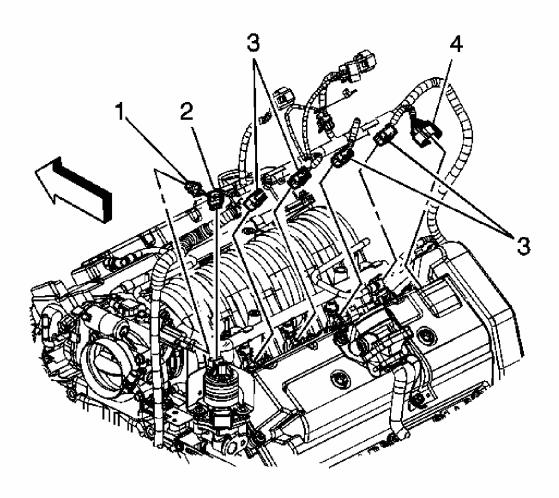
Locating Engine Harness Electrical Connectors Courtesy of GENERAL MOTORS CORP.
